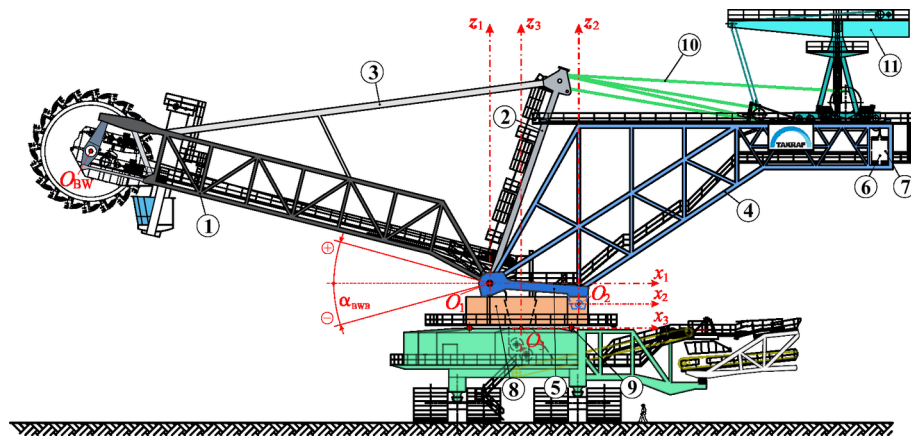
Structural scheme of the BWE SRs 2000 slewing superstructure: 1-bucket wheel boom; 2-mast; 3-stay of the bucket wheel boom; 4-counterweight boom; 5-KBS; 6-counterweight in the containers; 7- weight for tensioning of the ropes of the bucket wheel boom hoisting mechanism; 8-slewing platform; 9-radial slew bearing; 10-ropes of the bucket wheel boom hoisting mechanism; 11-dismantling crane;  $O_{BW}$ -centre of the bucket wheel;  $O_1$ -joint of the bucket wheel boom;  $O_2$ -KBS joint;  $O_3$ -center of the radiaxial slew bearing;  $\alpha_{BWB}$ -inclination angle of the bucket wheel boom
